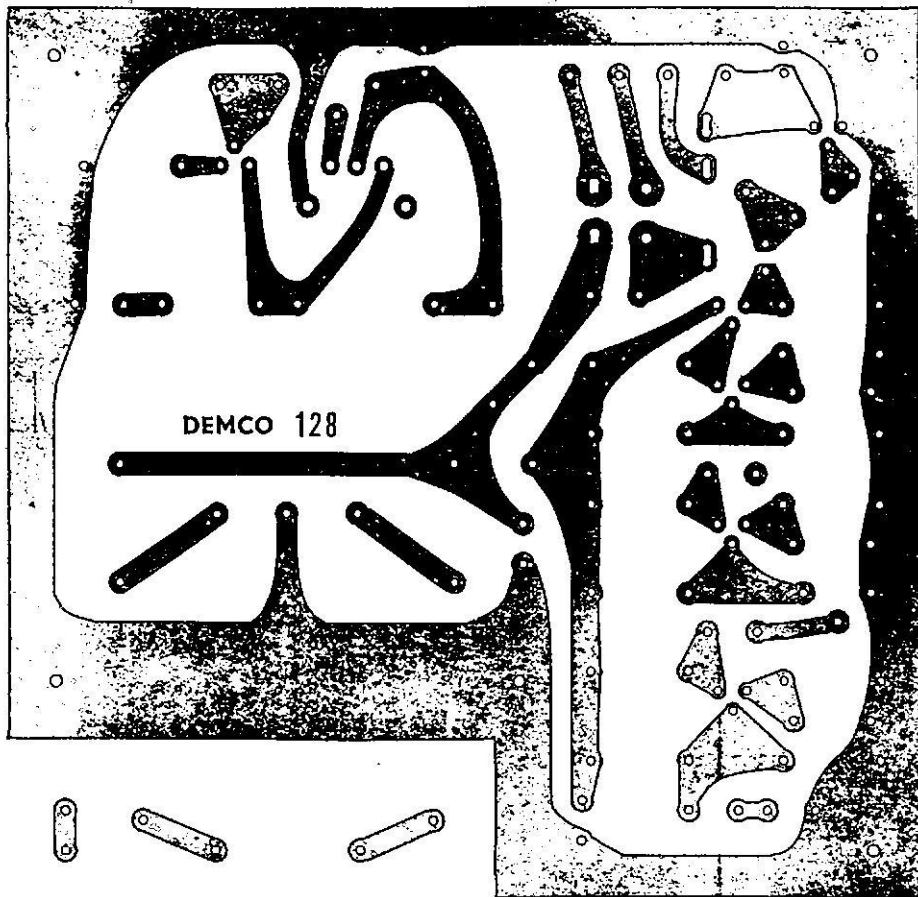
Actual size photo of conductor side of printed circuit board. Components can be mounted on any type of chassis, but care should be exercised to prevent stray leakage, or coupling.
